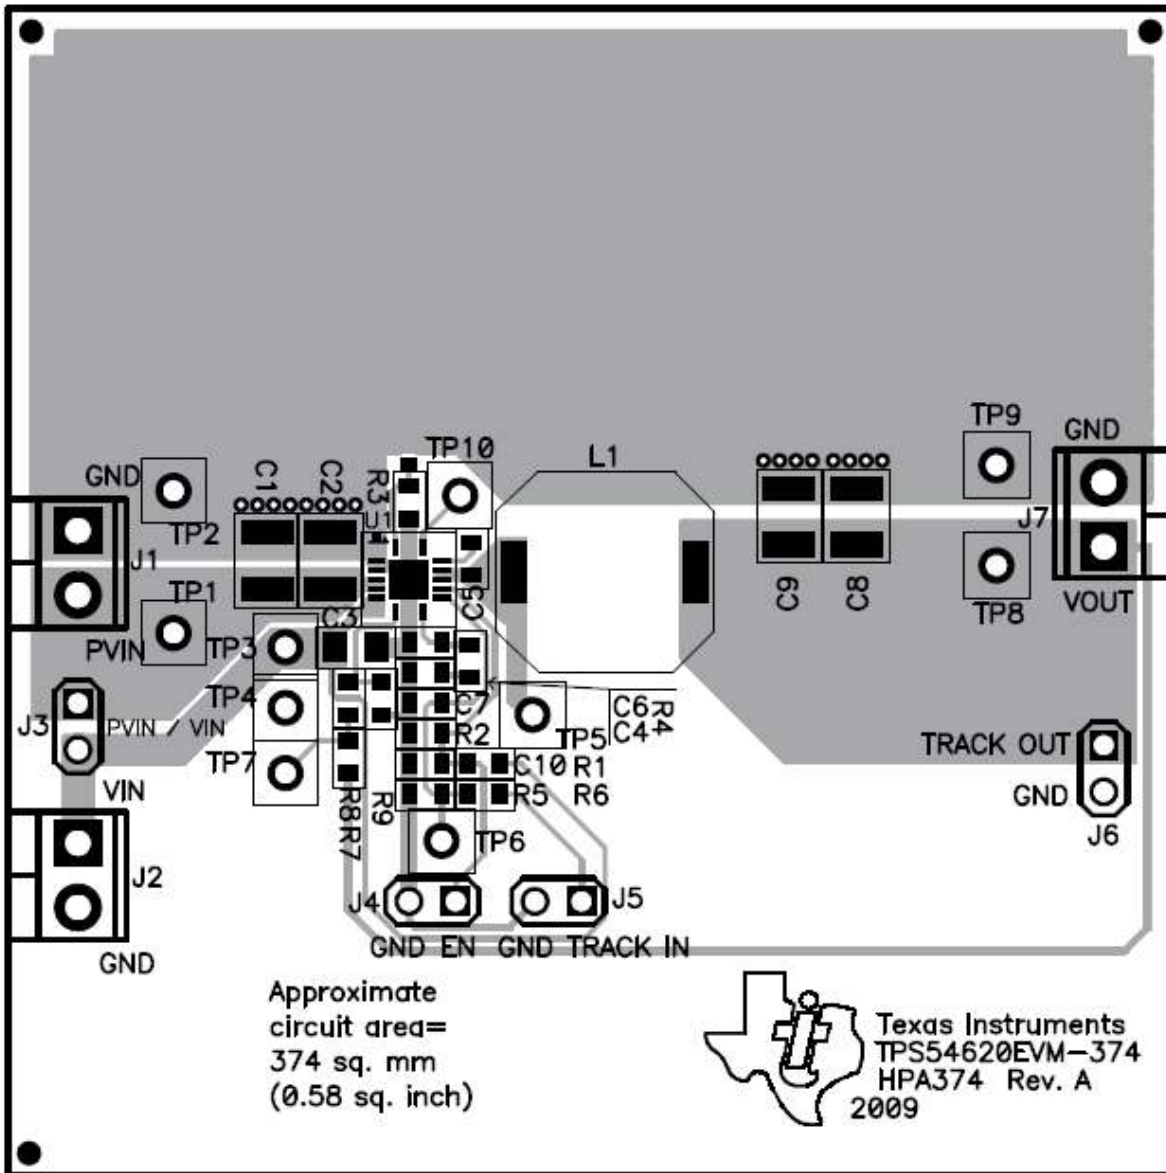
TPS54620EVM-374 Top-Side Assembly
